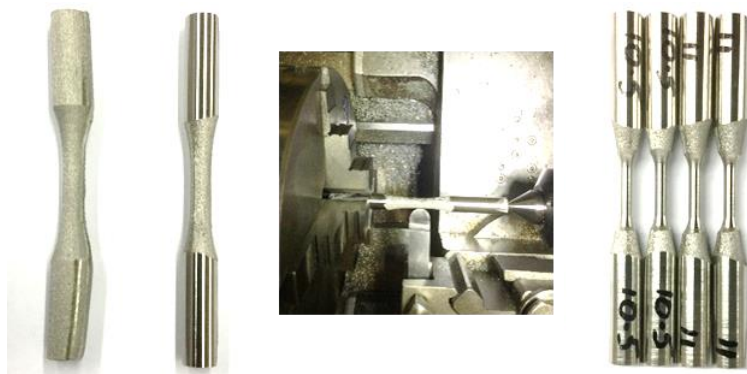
Machined buckled horizontal SLM Ti6Al4Va tensile specimens
